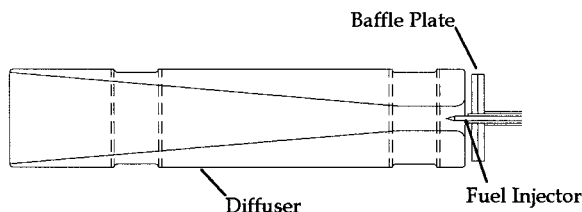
Schematic of the fuel injector/mixer/diffuser assembly.
